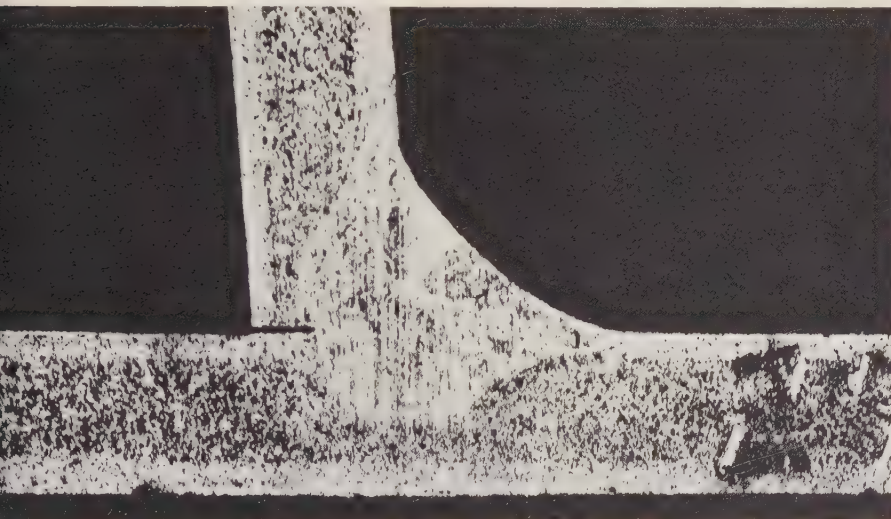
Similar penetration is obtained in a fillet weld using a helium-argon mixture as the shielding gas.
